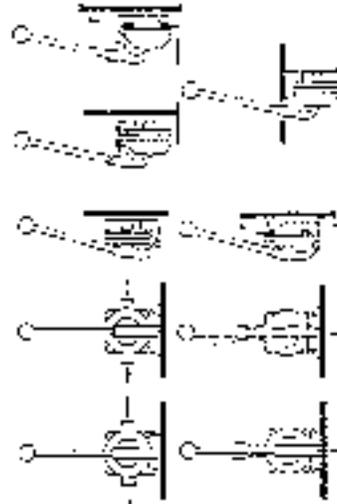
Some of the many mounting arrangements possible with the standard pump.
